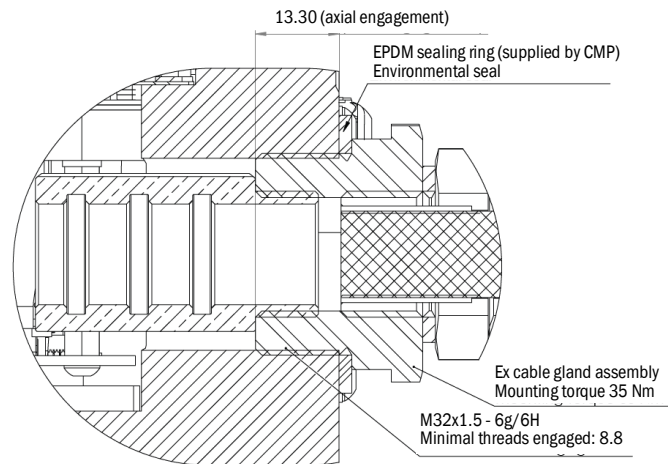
Threaded flame path between Ex cable gland and Ex enclosure body
